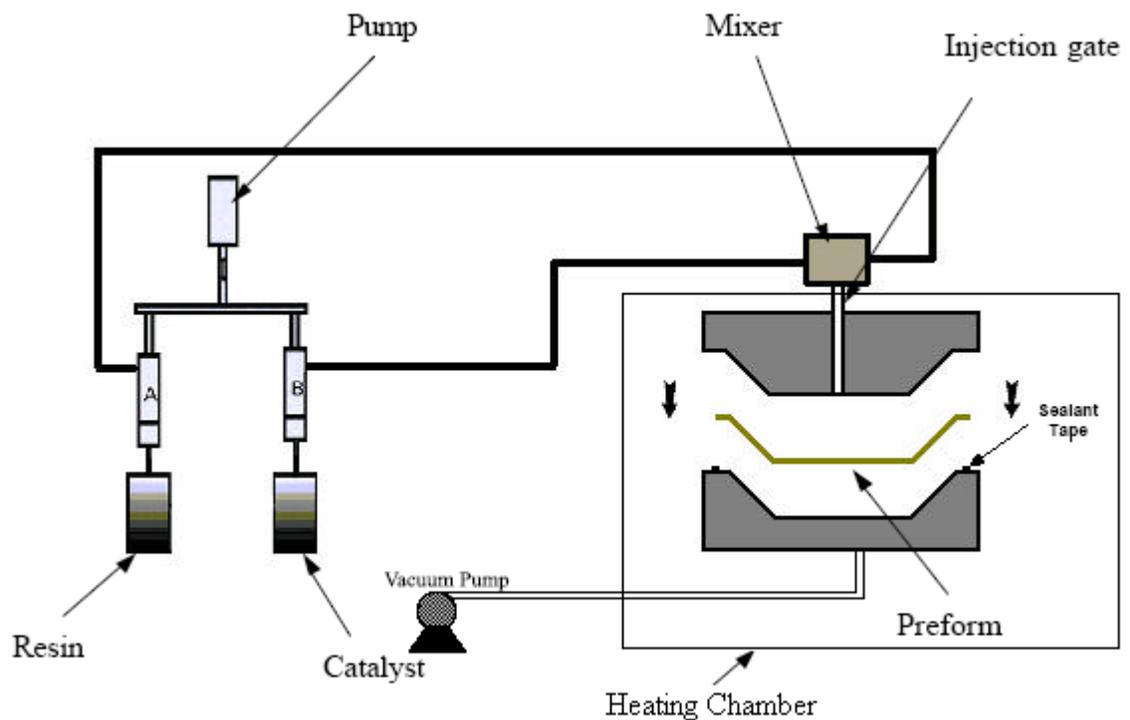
Vacuum-assisted resin transfer molding process showing the preform being inserted into a matched metal mold for a pressure drawdown operation, using the vacuum pump and a resin transfer pump.
